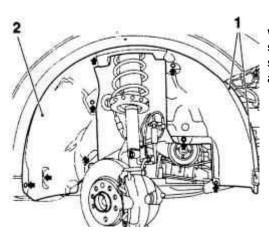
Mounting security front wheel arch - the arrows indicate spacers rivets arch: 1 - mounting screws and 2 - protection of the arch
